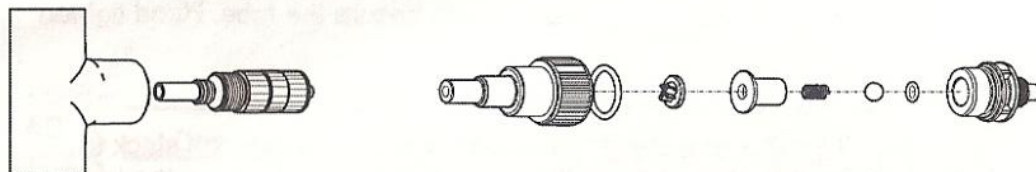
C-600P INJECTION/CHECK VALVE TEE INSTALLATION AND EXPLODED VIEW
